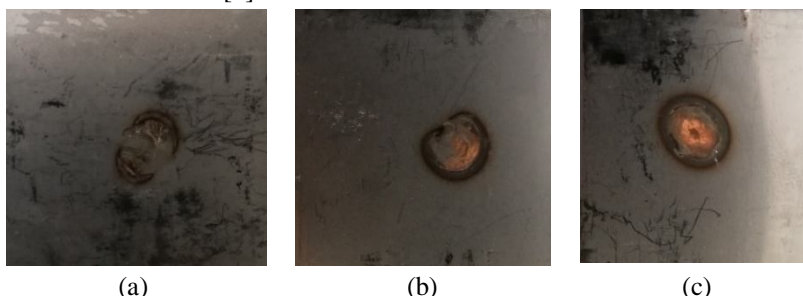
The appearance of welding cores of samples welded using an uncooled CuCo<sub>2</sub>Be electrode and a) 5 Cycle, a) 10 Cycle, a) 15 Cycle welding time under 4 Bar electrode force and 5.4 kA welding current
